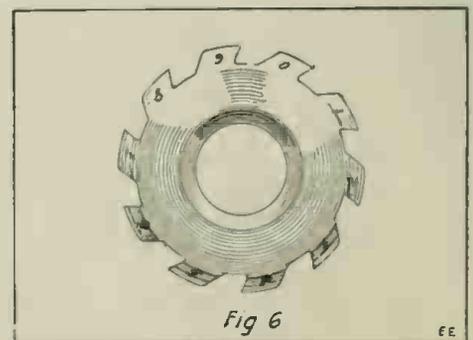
Cutting Member of Universal Thread-Cutting Tool as Shown in Fig. 7, Above. Each Size of Tooth is Numbered as Indicated in the Drawing.
